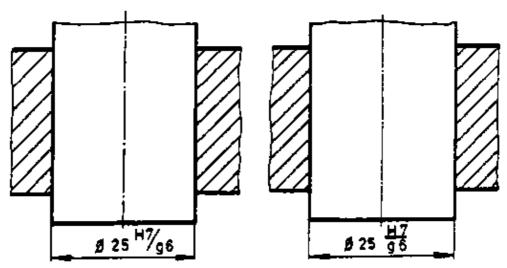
Entry of abbreviated designations of fits indicating their dimensions in assembly drawings
